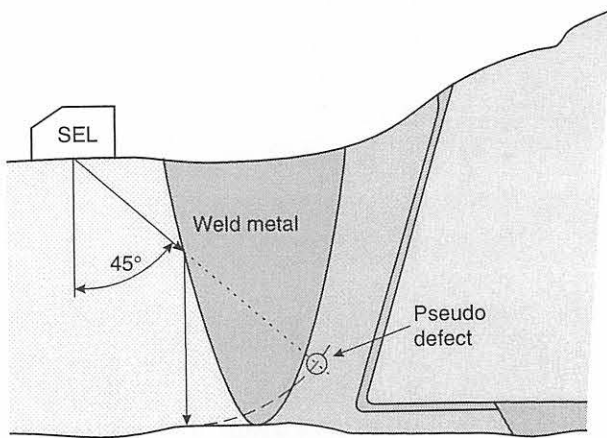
Typical example of the pseudo defect signal during austenitic stainless steel weld inspection; SEL: longitudinal wave transmitter-receiver transducer; after [38]
